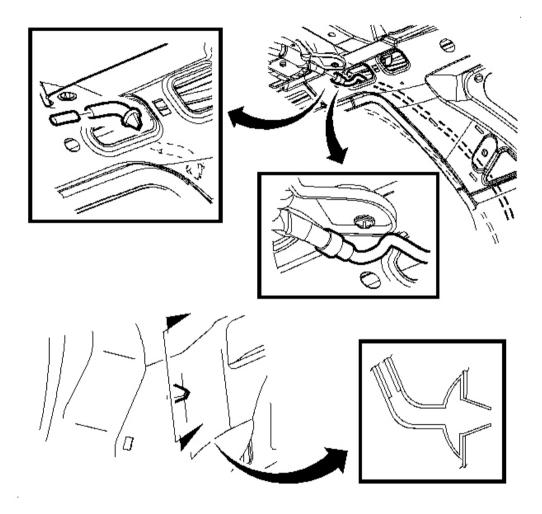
Removing/Installing Rear Drain Hoses On Sunroof Module Courtesy of GENERAL MOTORS CORP.
